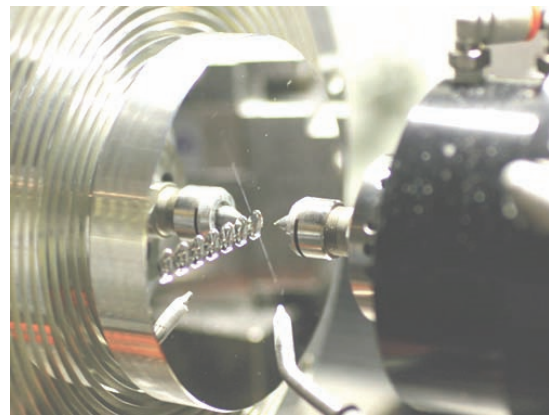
Milling a lens array with a single flute diamond ball end-mill mounted in an air bearing spindle. Photo credit: II-VI Incorporated.
